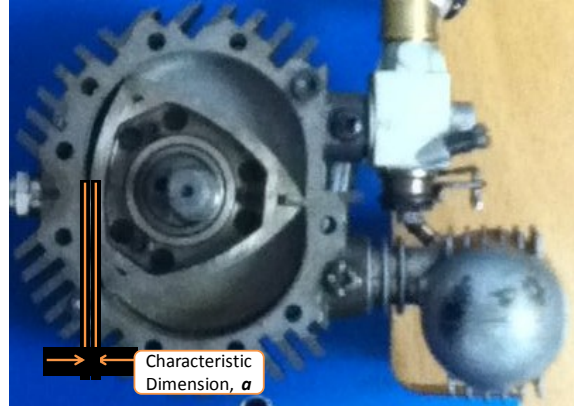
The characteristic dimension a as found in a rotary engine. This dimension could be better observed with a cross-section view as there is a combustion pocket in the triangular rotor surface.
